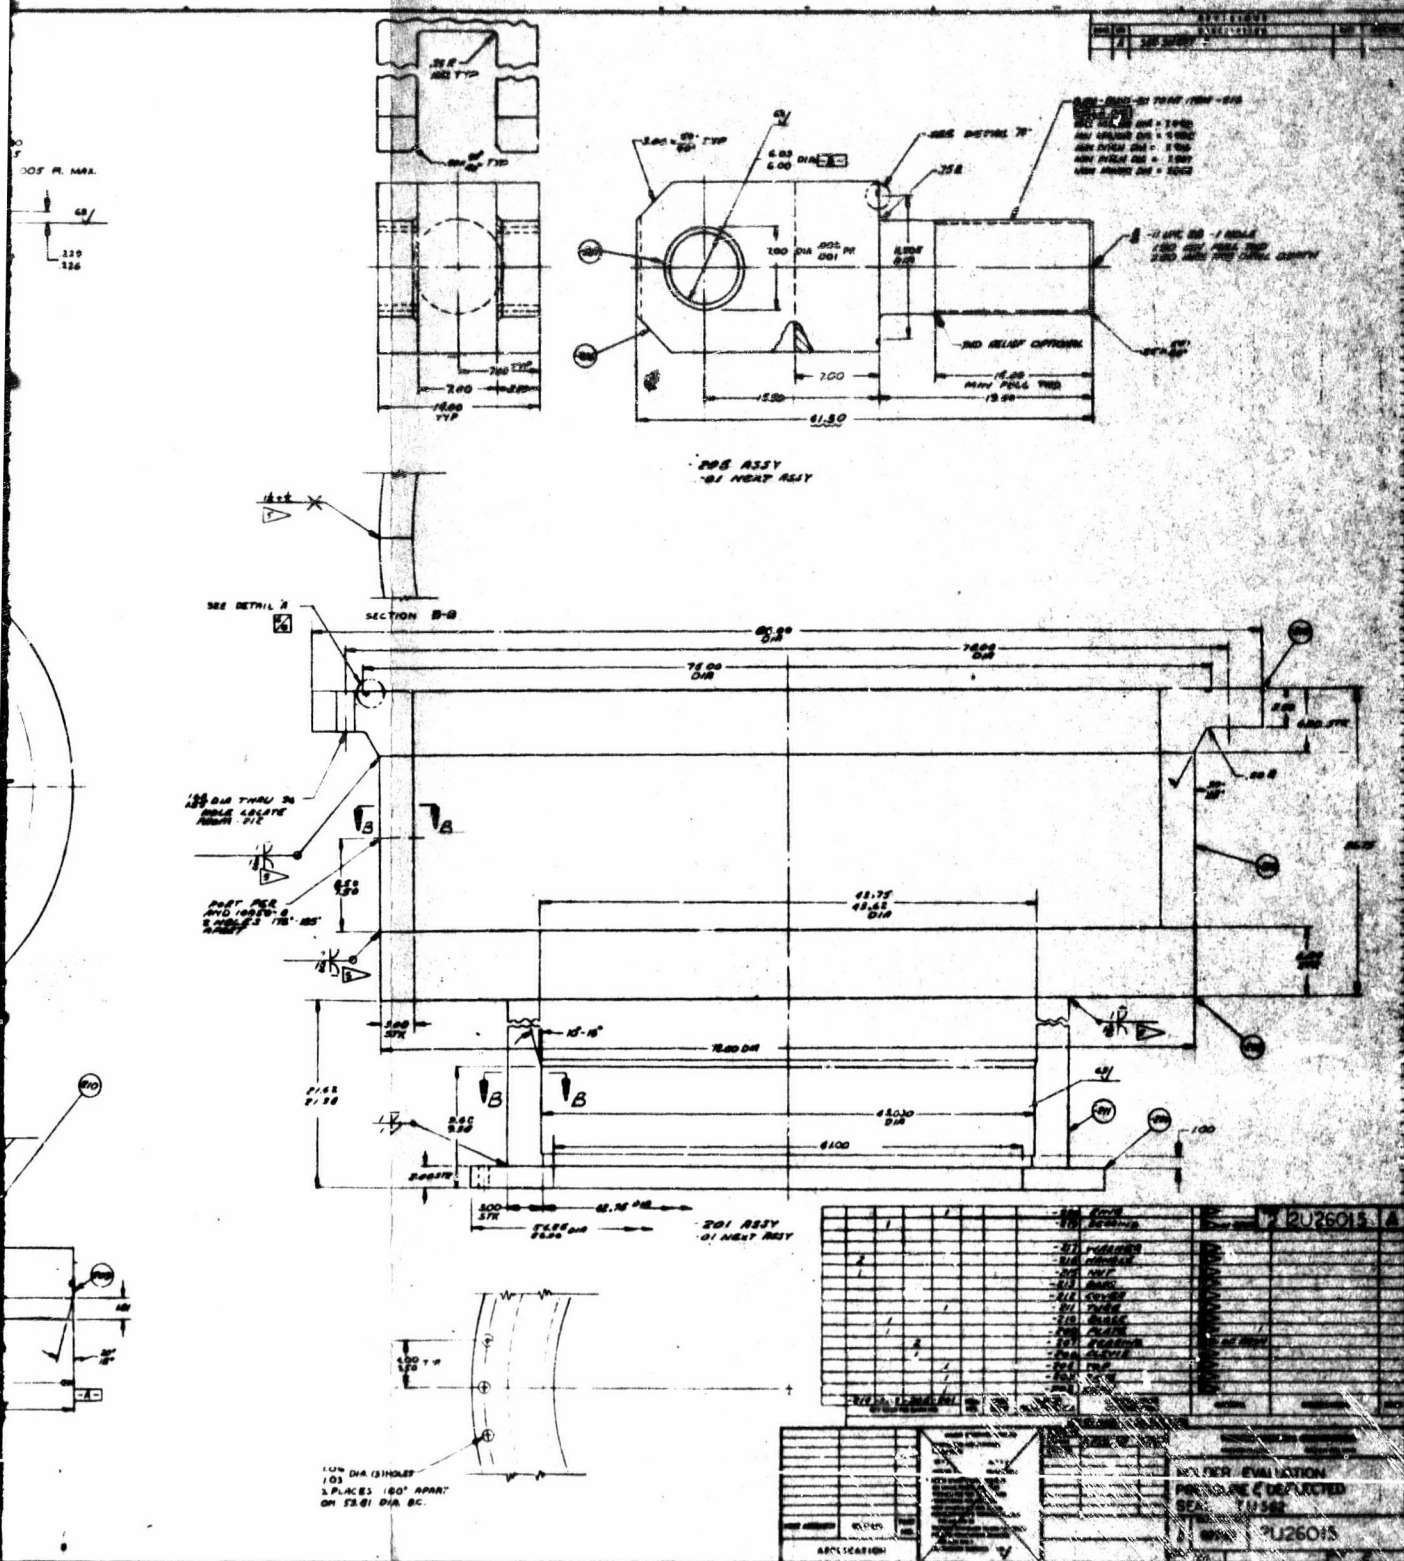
Flexible Seal Test Fixture (Sheet 3 of 2)
